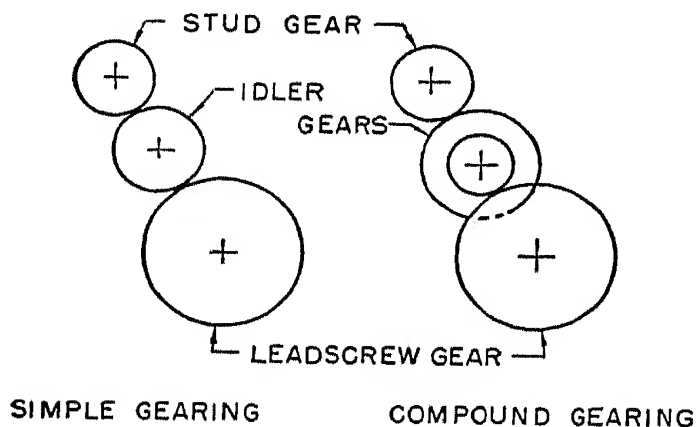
A diagram of change gears to drive the leadscrew on a lathe.
